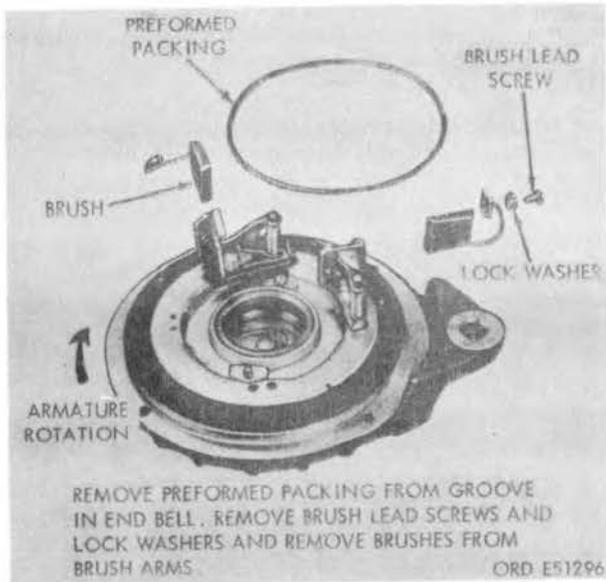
REMOVING PREFORMED PACKING AND BRUSHES.
